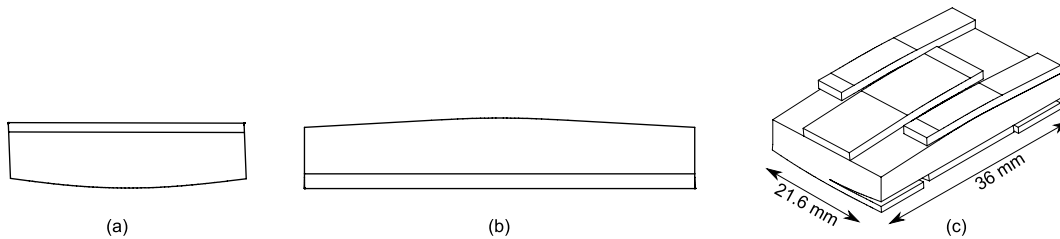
Resultant prototype surface geometry without flexures or endplates, in the (a) sagittal and (b) frontal planes. (c) An isometric view of the prototype surface and flexure geometry without endplates. A photograph of the prototype with endplates is shown in Figure 2.
